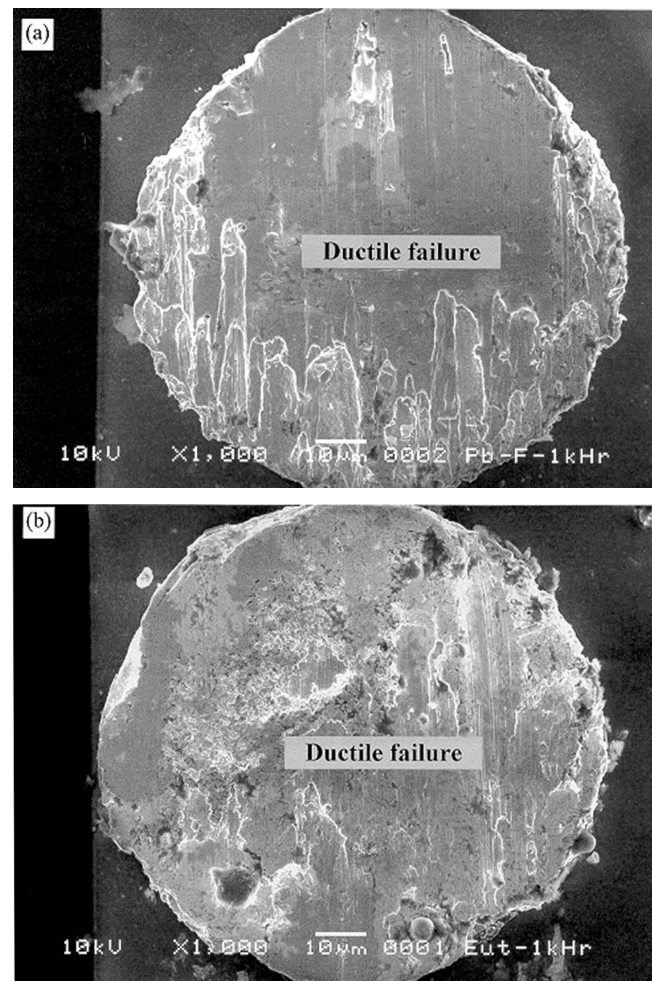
The fracture surfaces of samples (a) SnAgCu and (b) eutectic SnPb solder joints after 1,000 h of aging at 150°C.
